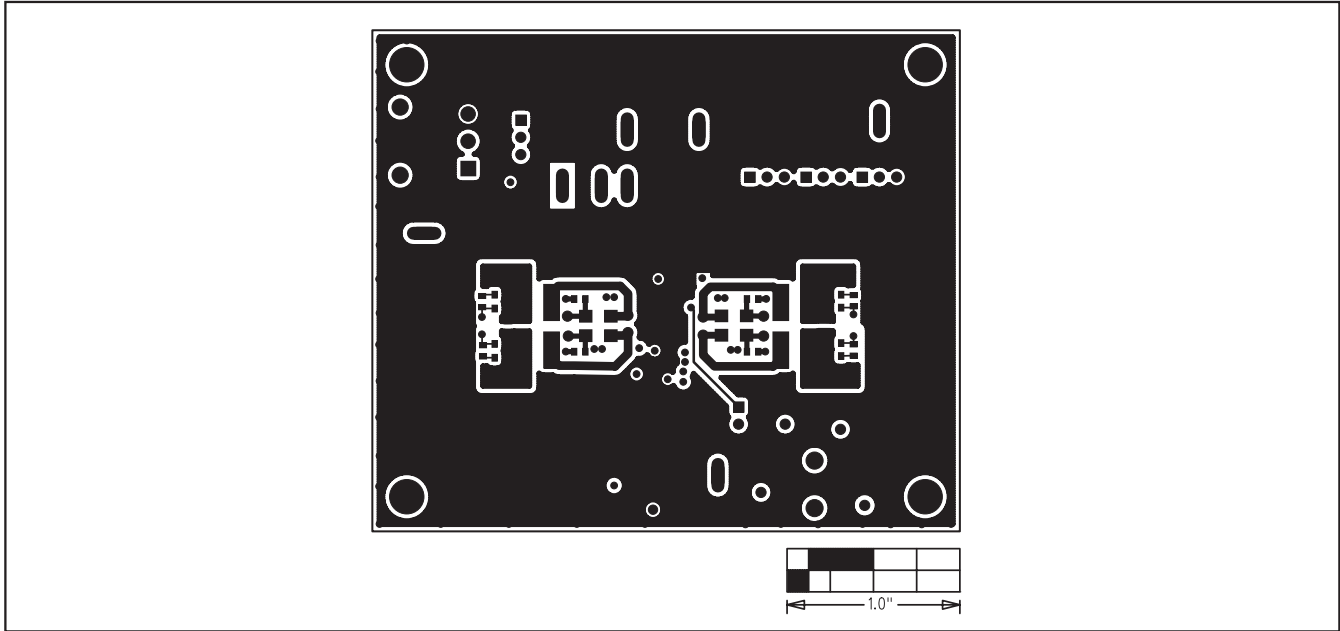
MAX9752A EV Kit PC Board Layout—Solder Side
